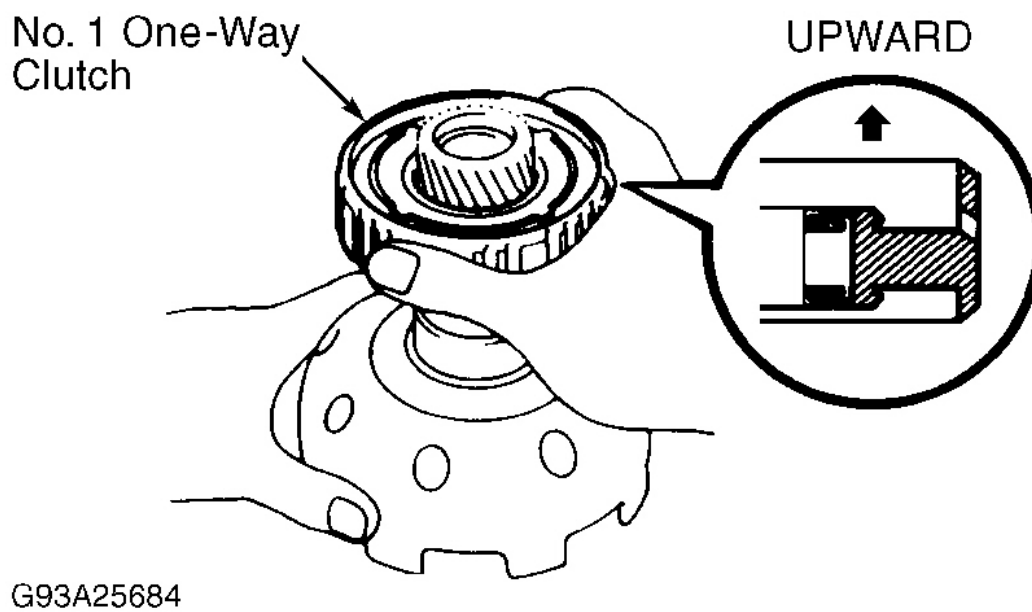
Installing & Checking No. 1 One-Way Clutch
